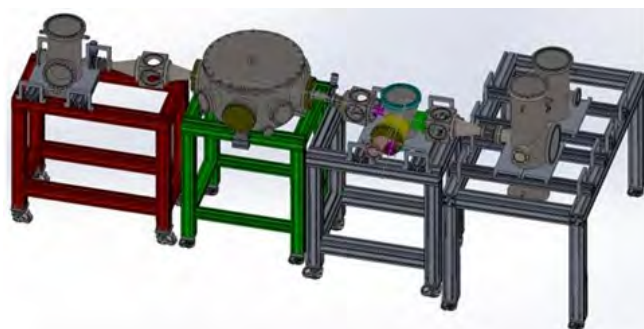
Assembly of the Beamline for XUV-IR Pump-Probe Spectroscopy (Atto Second Beam Line Assembly)
